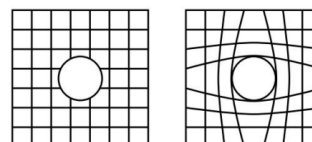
Making holes by cutting or drilling (left) and by deflecting the fibres without breaking (right) [21]
